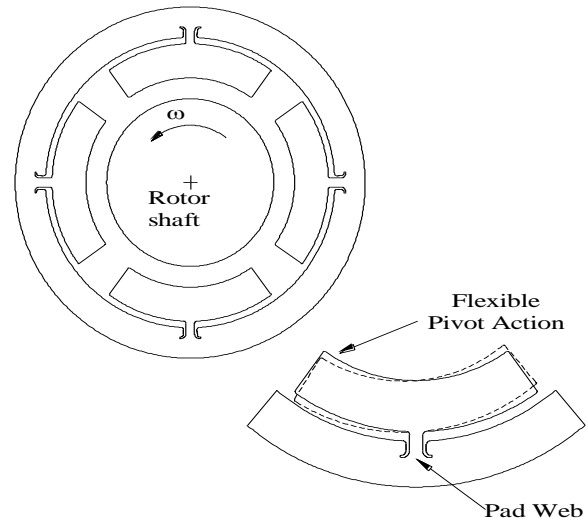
Flexure-pivot-pad bearing (Rodriguez and Childs)
